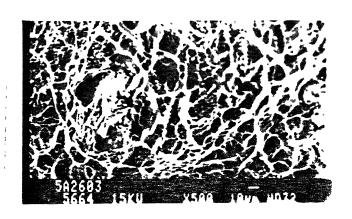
Micrograph of fractured surface of hot rolled strip
